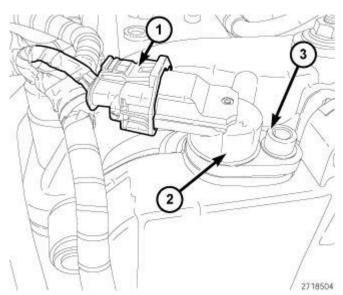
CAMSHAFT POSITION SENSOR HARNESS CONNECTOR Courtesy of CHRYSLER LLC
